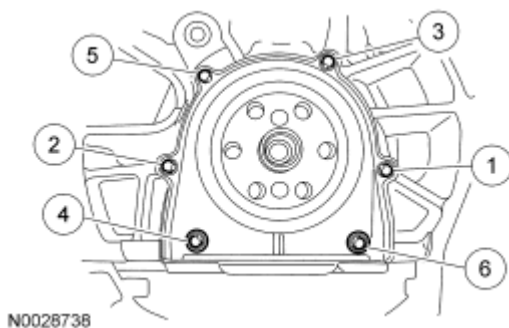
Identifying Tightening Sequence Of Crankshaft Rear Oil Seal Bolts
